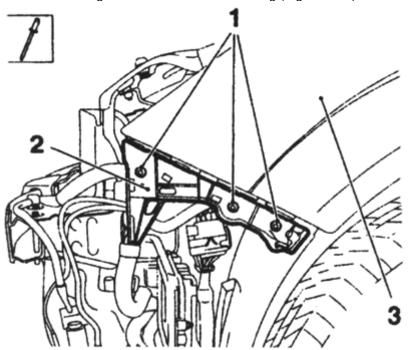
Rivets side guide front wing: 1 - rivets, 2 - side slide 3 - wing
